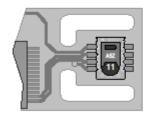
Top view of example of mounted SHT1x with slits milled into PCB to minimize heat transfer.
